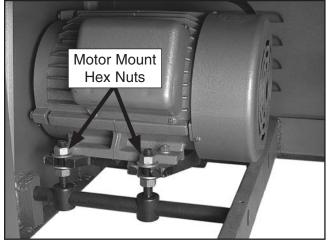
Front cabinet cover removed to access motor mount hex nuts.
